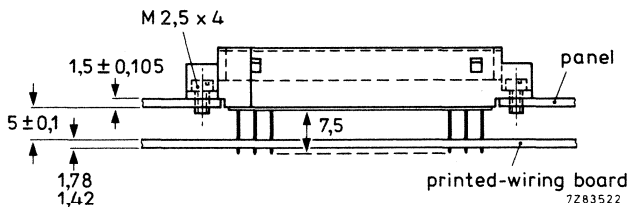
Mounting example of a male part with dip-solder pins (7,5 mm).
